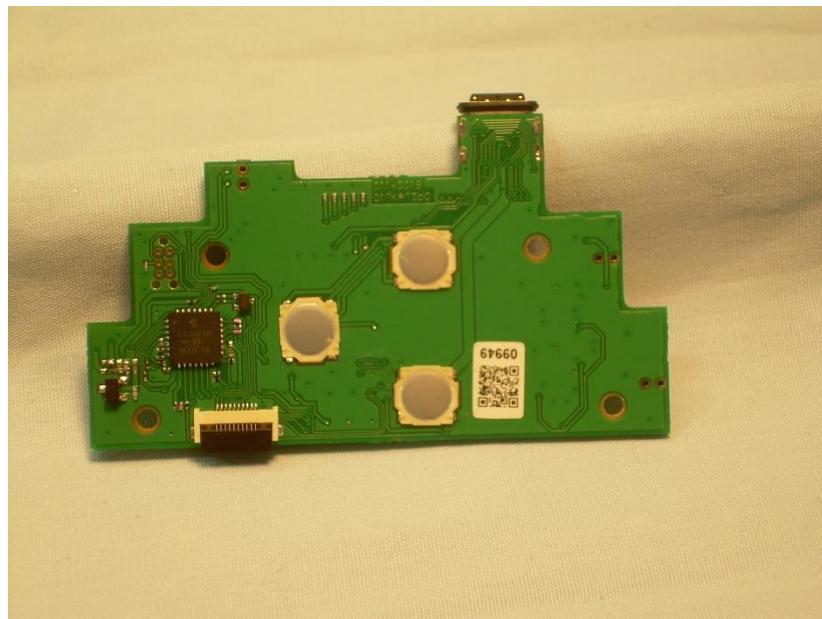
Front Side of the Main PCB with RF Shield Removed
